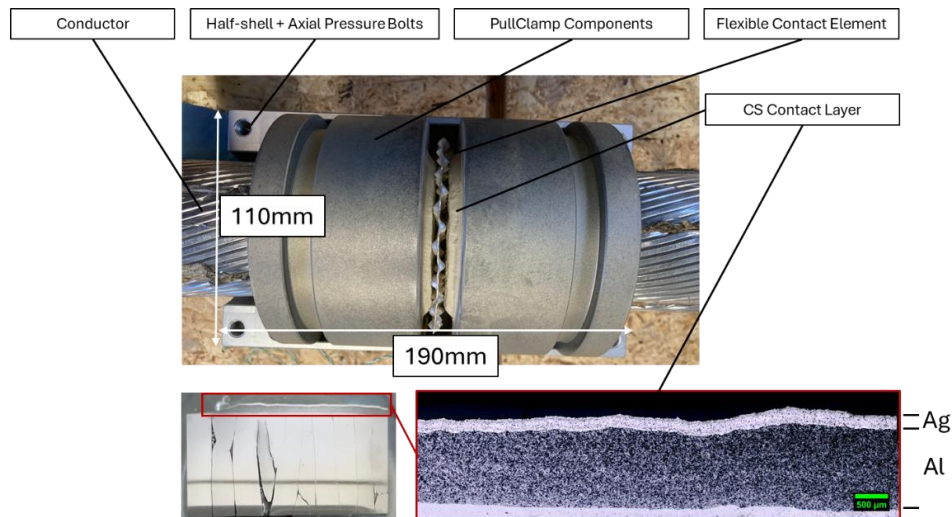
Side view and cross section novel connector solution using cold spray technology
